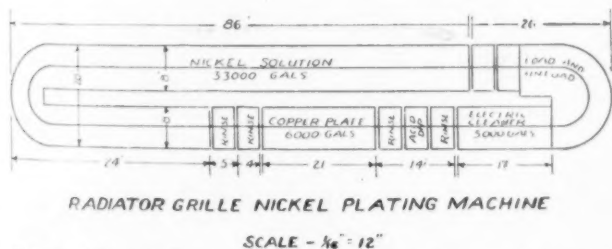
Sketch plan of plating tanks of automatic copper and nickel plating machine.
